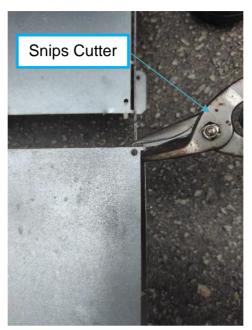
b— Use a snips cutter to cut the joining point on the metal sheet cover.
